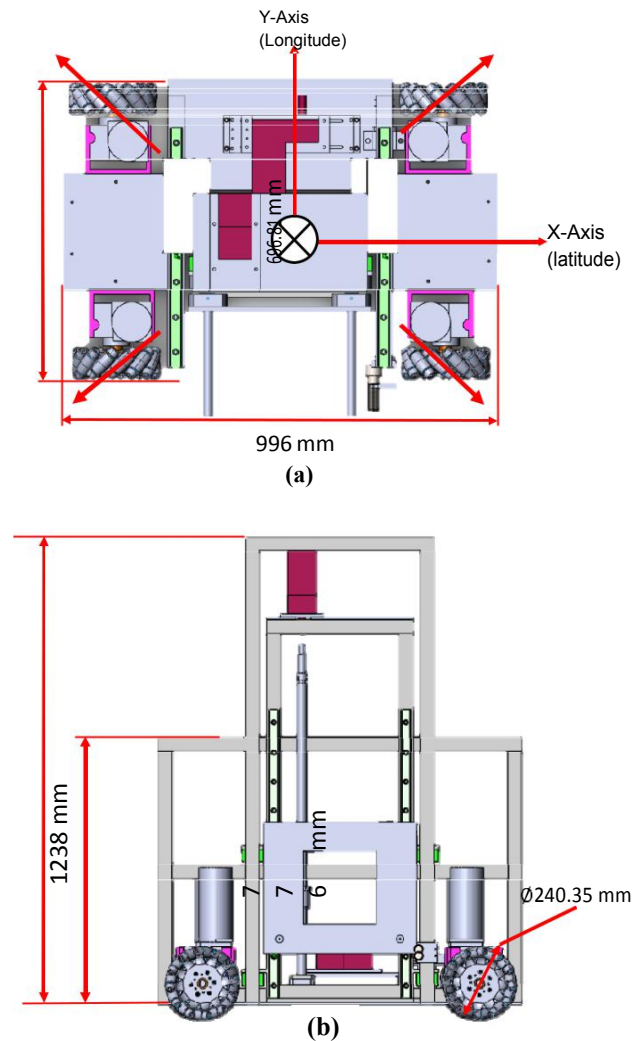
MHeLFAGV Overall Dimension; (a) Top view, (b) Side View
